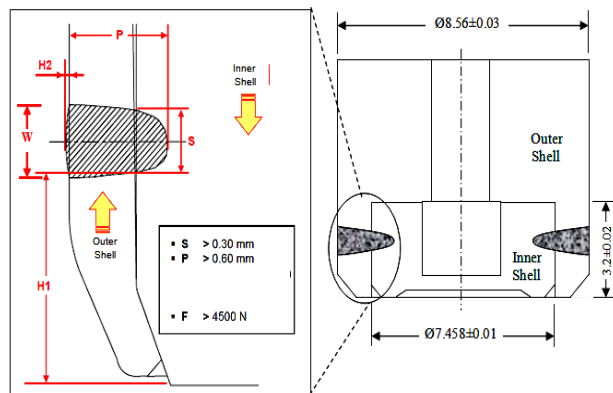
Characterization of welding cross-section (W: Weld width, P: Weld penetration depth, S: Weld resistance length).
